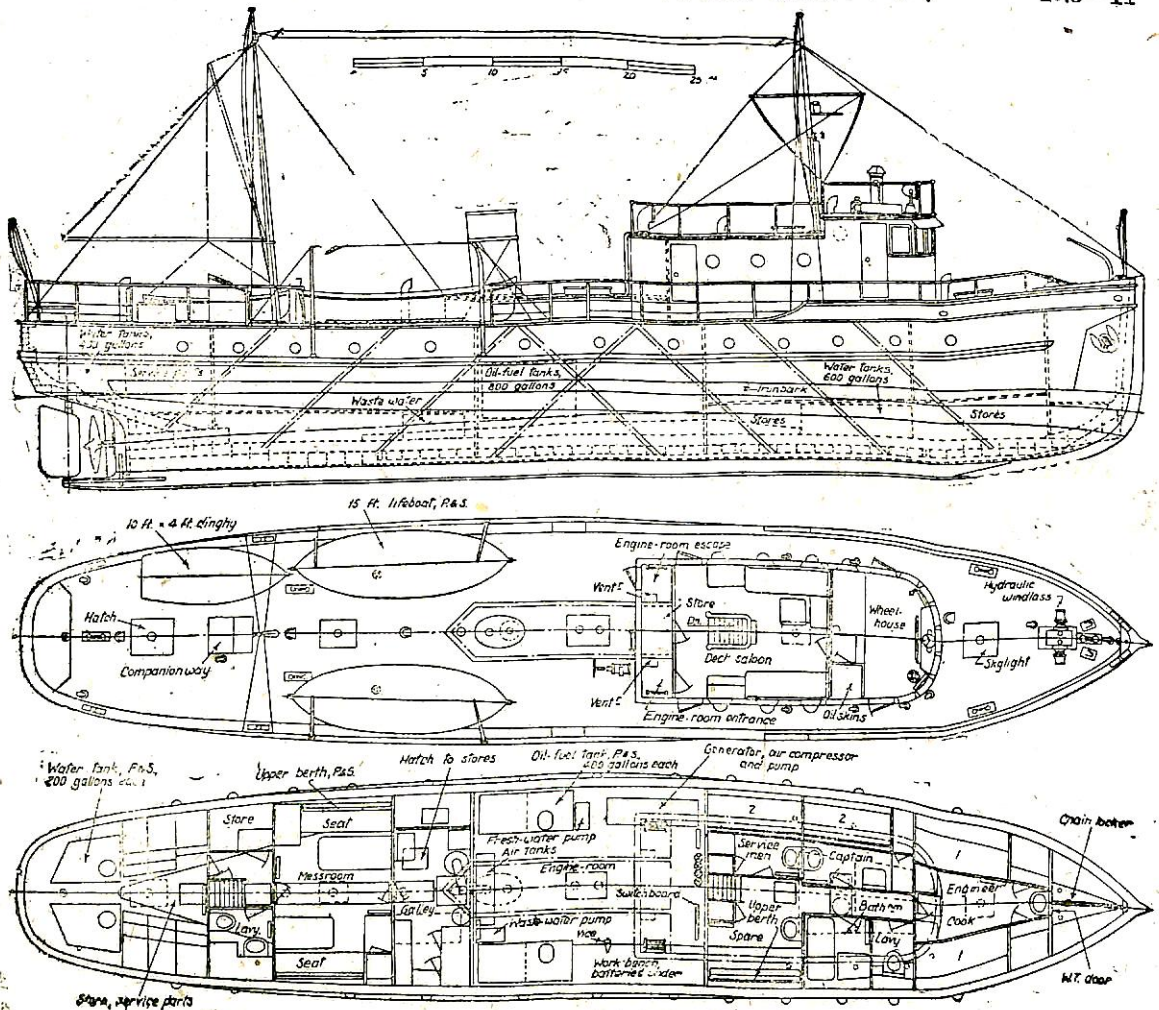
General Arrangement of the Canadian-built Single-screw Motorship "Cancolim II."
